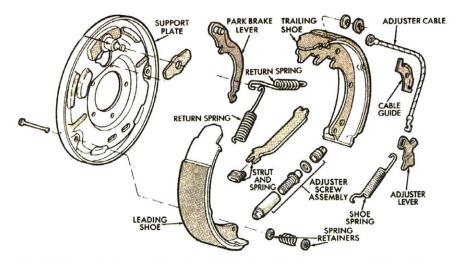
, rear brake assembly of the 10-inch drum brake components-MJ metric ton
